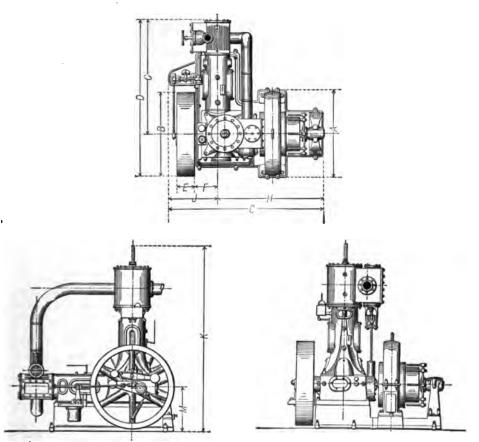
AMERICAN-BALL ANGLE COMPOUND ENGINE.
